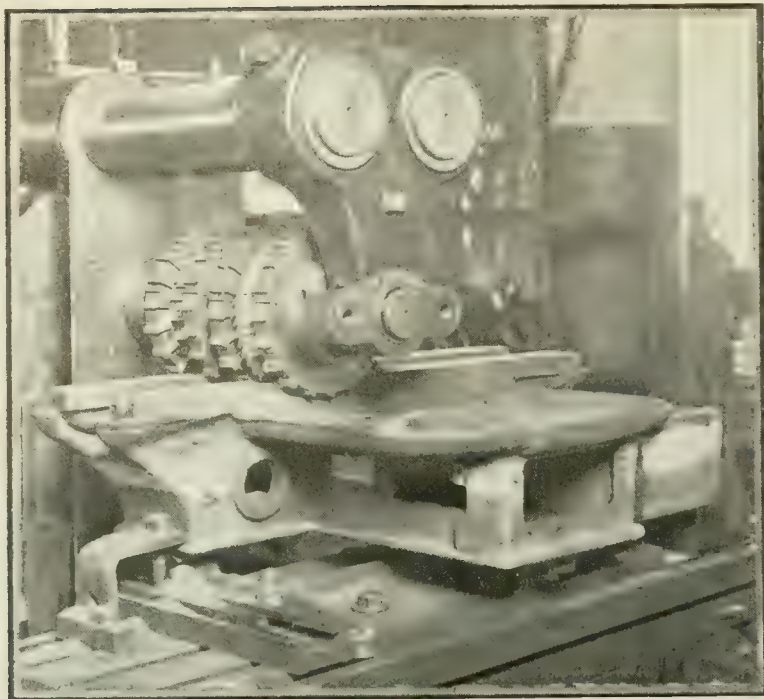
MILLING THE WAYS OF A GRINDER BED.
